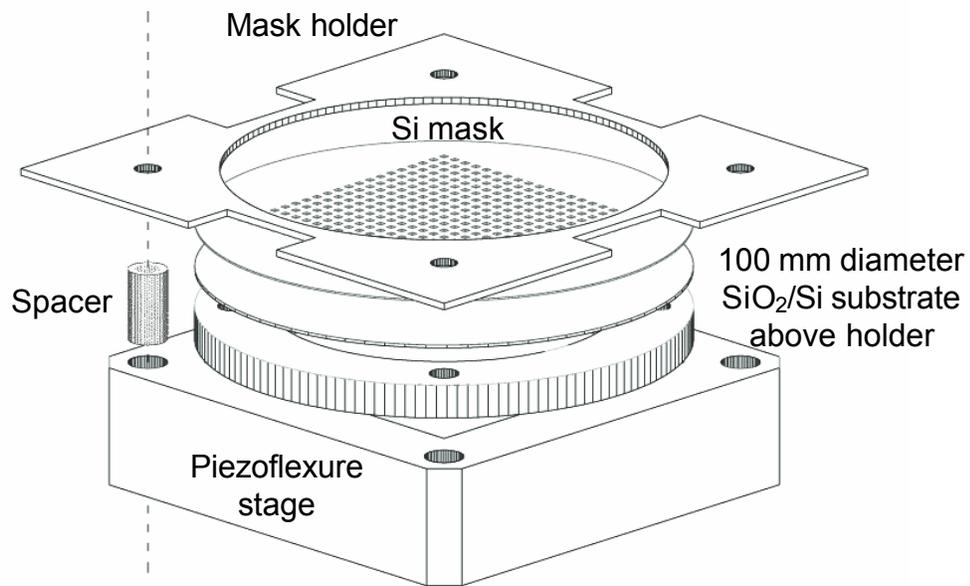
Schematic diagram of the mask – substrate fixture assembly. The wafer holder ring is mounted on the moving middle part of the piezoflexure stage whose motion is controlled by low voltage (0 to 100 V) piezoelectric drives. The mask holder plate is mounted on the stationary frame of the stage at a distance set by spacers.
